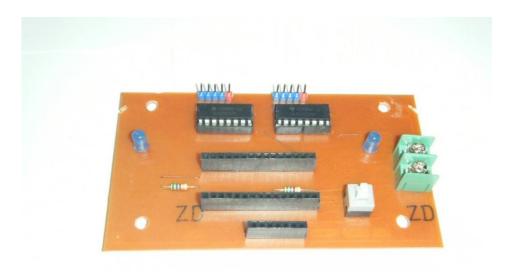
Control Circuit Board Preparation for Control Unit Assembly
